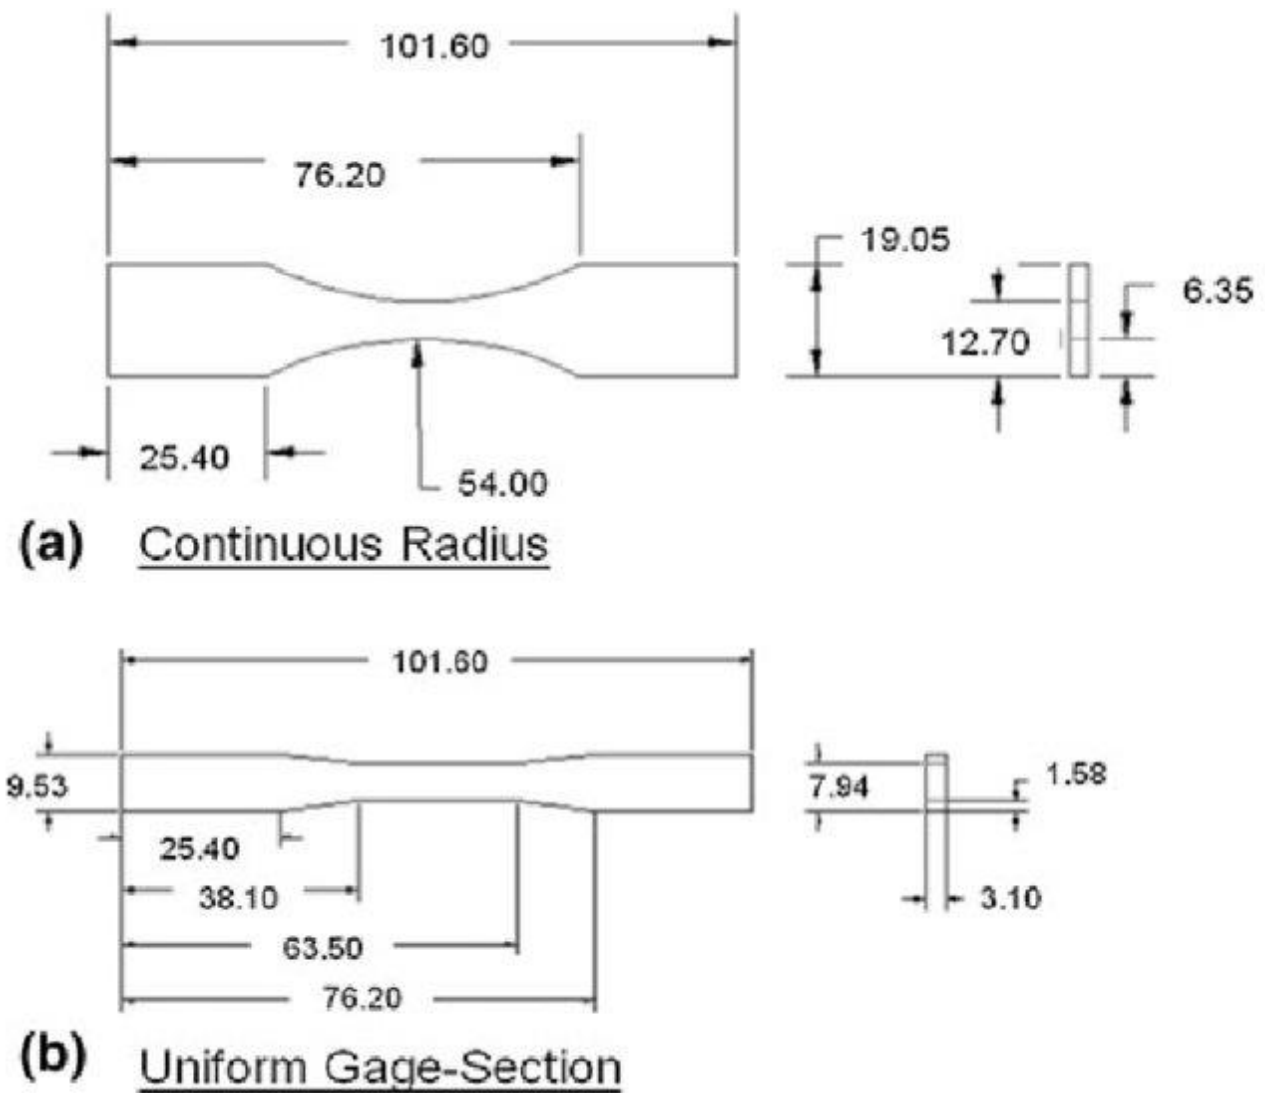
ASTM flat fatigue specimen dimensions (mm): a - continuous radius, (b) uniform gage-section
